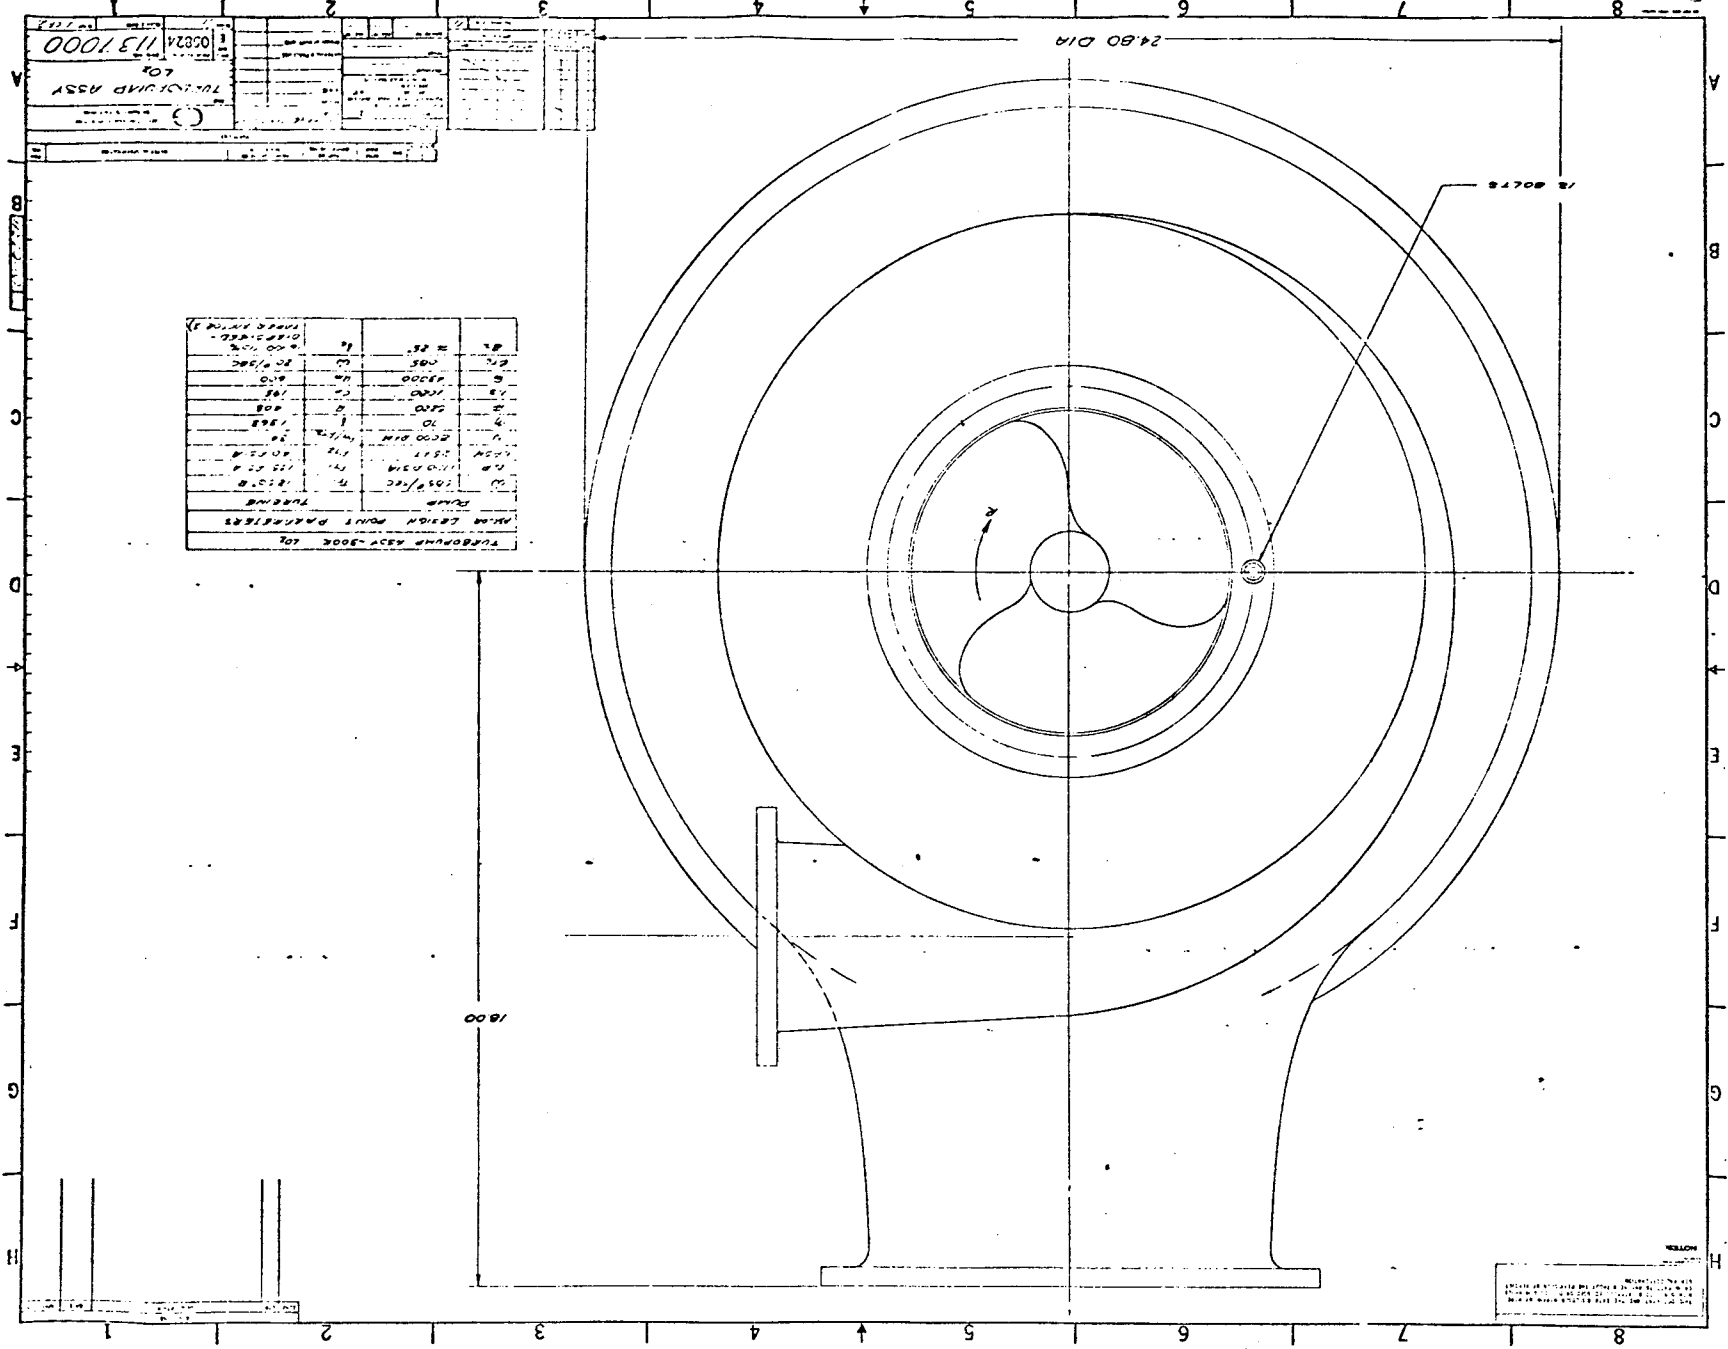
LOX Turbopump Assembly (Sheet 1 of 2)
